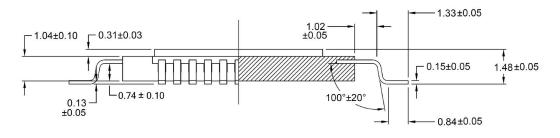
Package Drawing (dimensions are in millimeters) 44-lead CQFP
